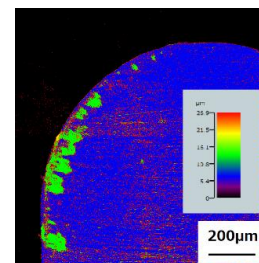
3D geometry of the tool rake face after cutting speed 10m/min, cutting time 60s
